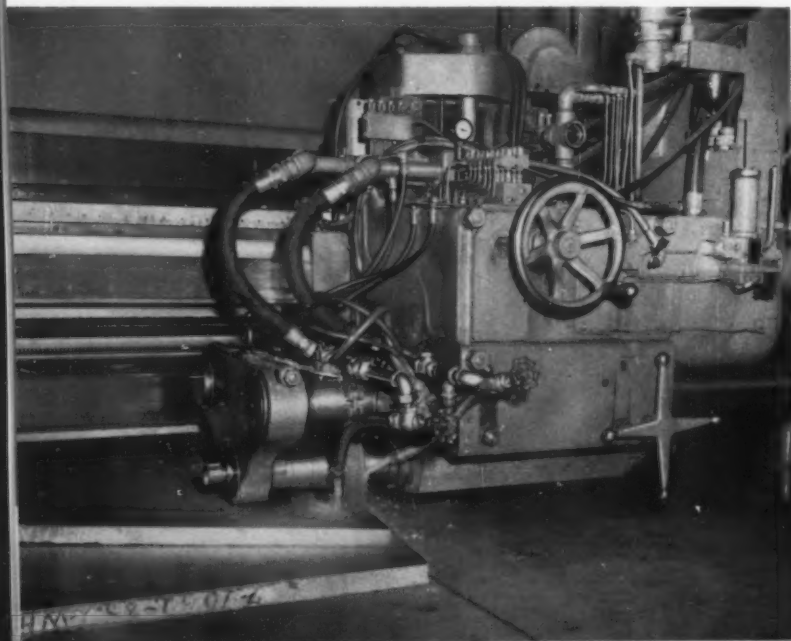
Horizontal head of skin mill equipped with 14-inch diameter cutter having inserted, carbide-tipped teeth. Cutters rotate at 1800 rpm with 50 hp and at 3600 rpm with 100 hp.
